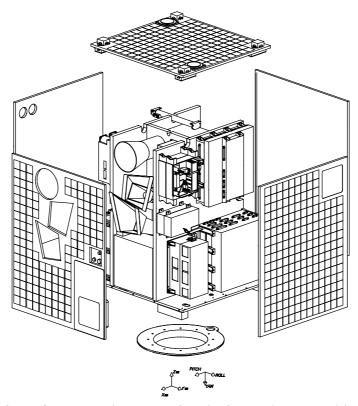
Exploded view of PROBA demonstrating the internal H-assembly with the units and the outer panels with the body mounted solar cells.
